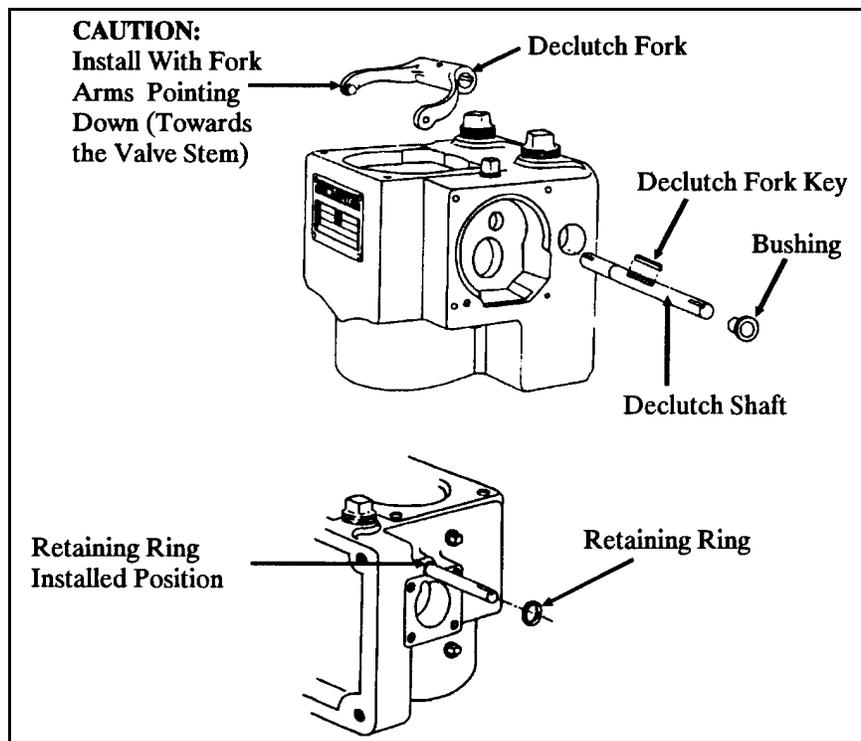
Declutch Shaft/Fork Assembly Installation
